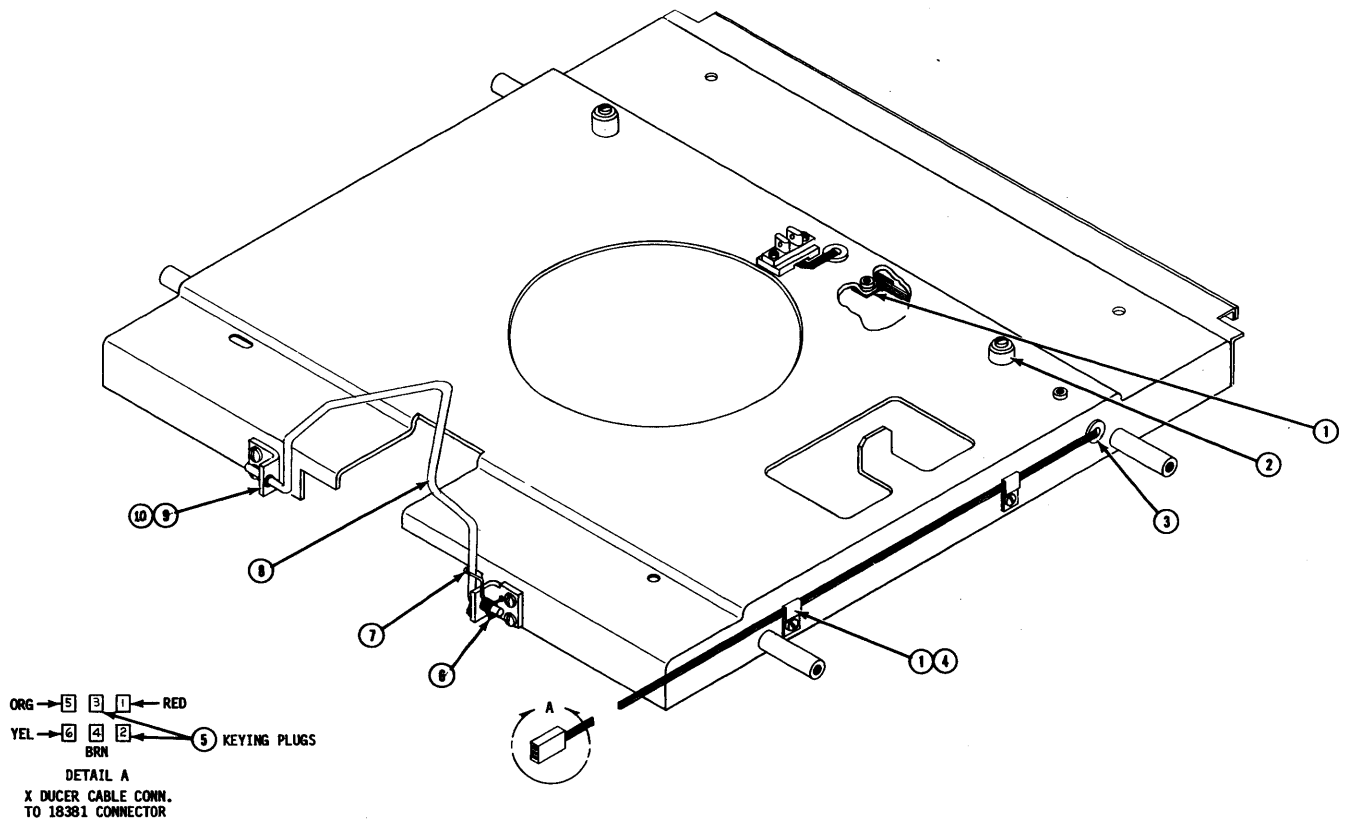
Fixed Disc Cover Assembly (73180), Left Side
